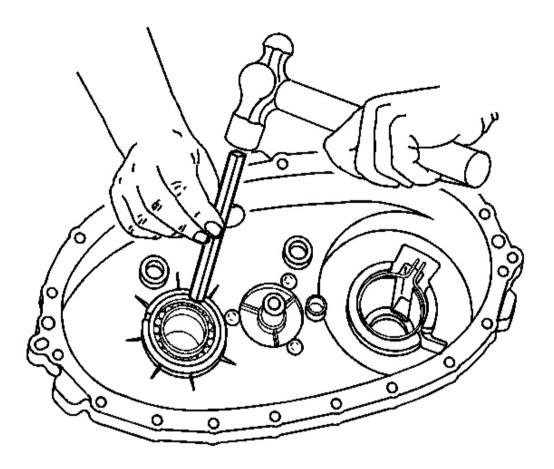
Installing Front Output Shaft Rear Bearing Courtesy of GENERAL MOTORS CORP.
